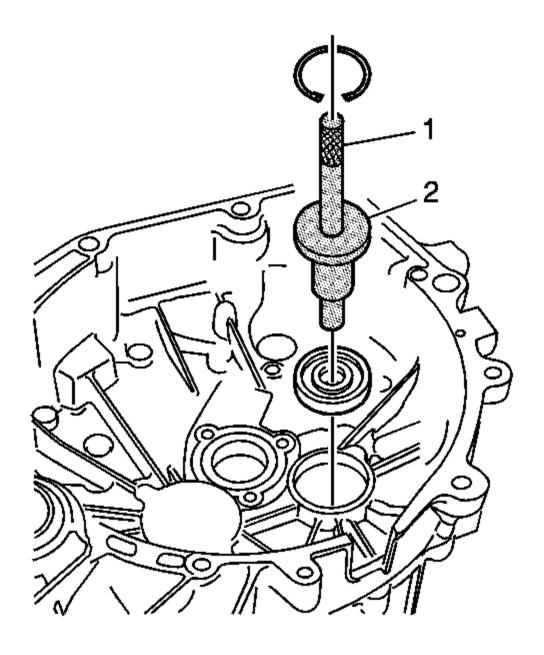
Installing Countershaft Bearing To Clutch Housing Courtesy of GENERAL MOTORS CORP.
